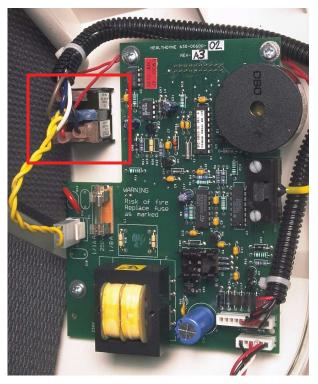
FIGURE L: VIEW OF POWER SWITCH FROM INSIDE THE FRONT CABINET ASSEMBLY
